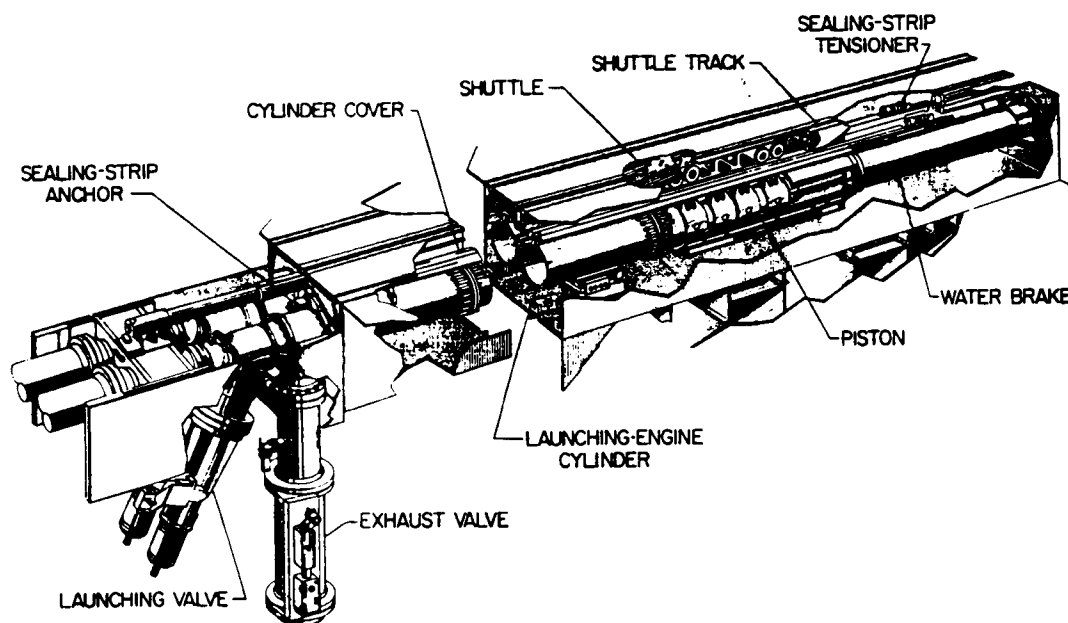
General Arrangement Drawing of Shipboard Catapult
